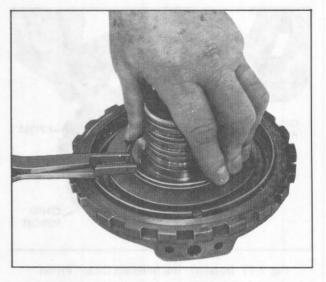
Removing Intermediate Clutch Snap Ring
